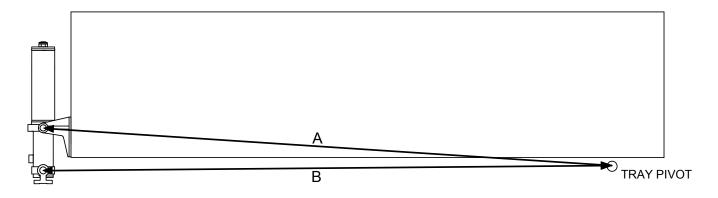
Suspension tube type cylinder mounting (dimensions to pin centrelines)
